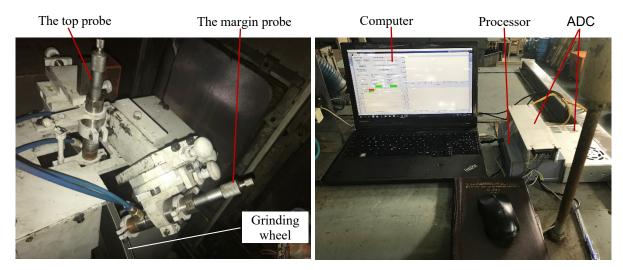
Experimental system measuring grinding wheel's wear for profile grinding ball bearing's inner ring grove after mounting two probes onto profile grinding machine 3MK136B [2, 3]
